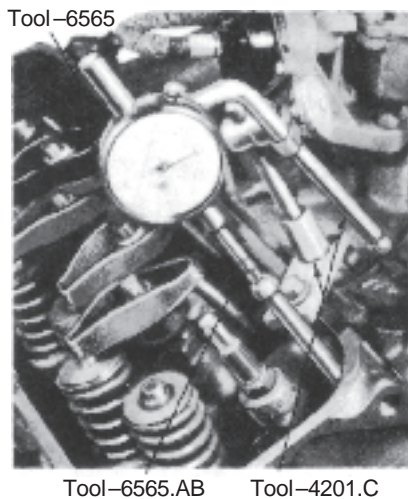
Testing Camshaft Lobe Lift-Stud Mounted Rocker Arms
